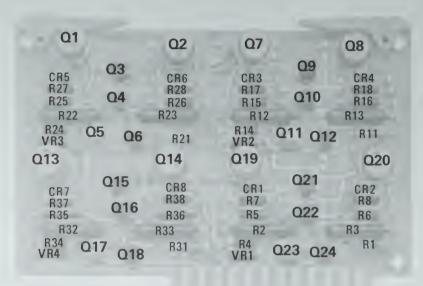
A9 Attenuator Driver Assembly Component Locations (Part of Change N)
